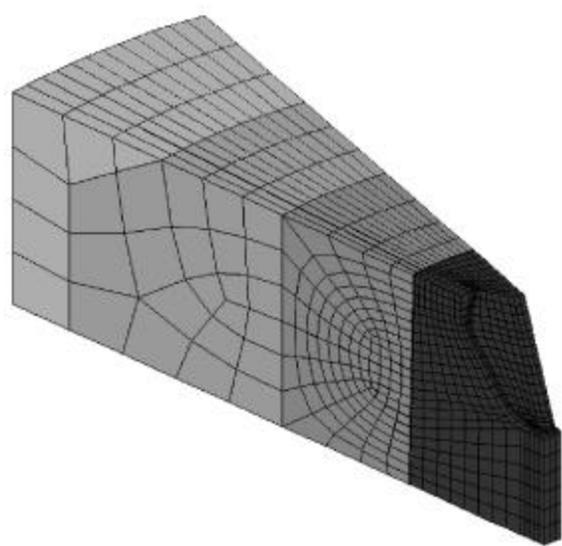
Finite-element model of STRECON<sup>®</sup> E<sup>+</sup> tool for bevel gear
